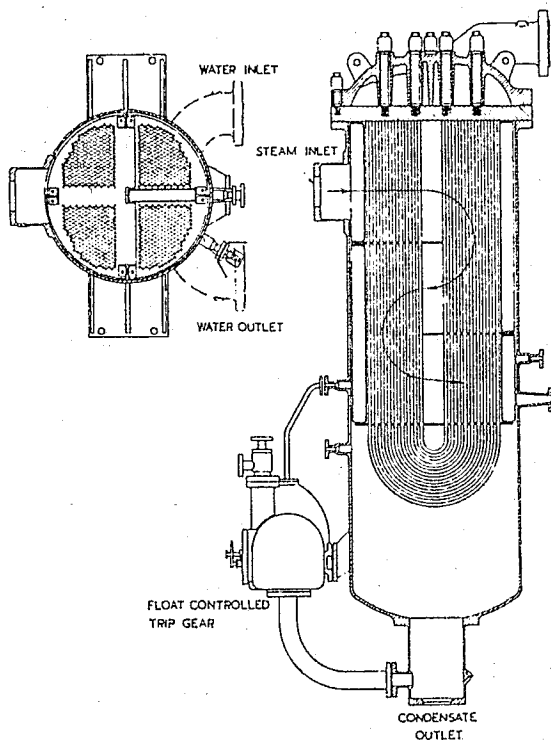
Longitudinal & plan view cross-sections of a 'U' type L.P. Heater.
